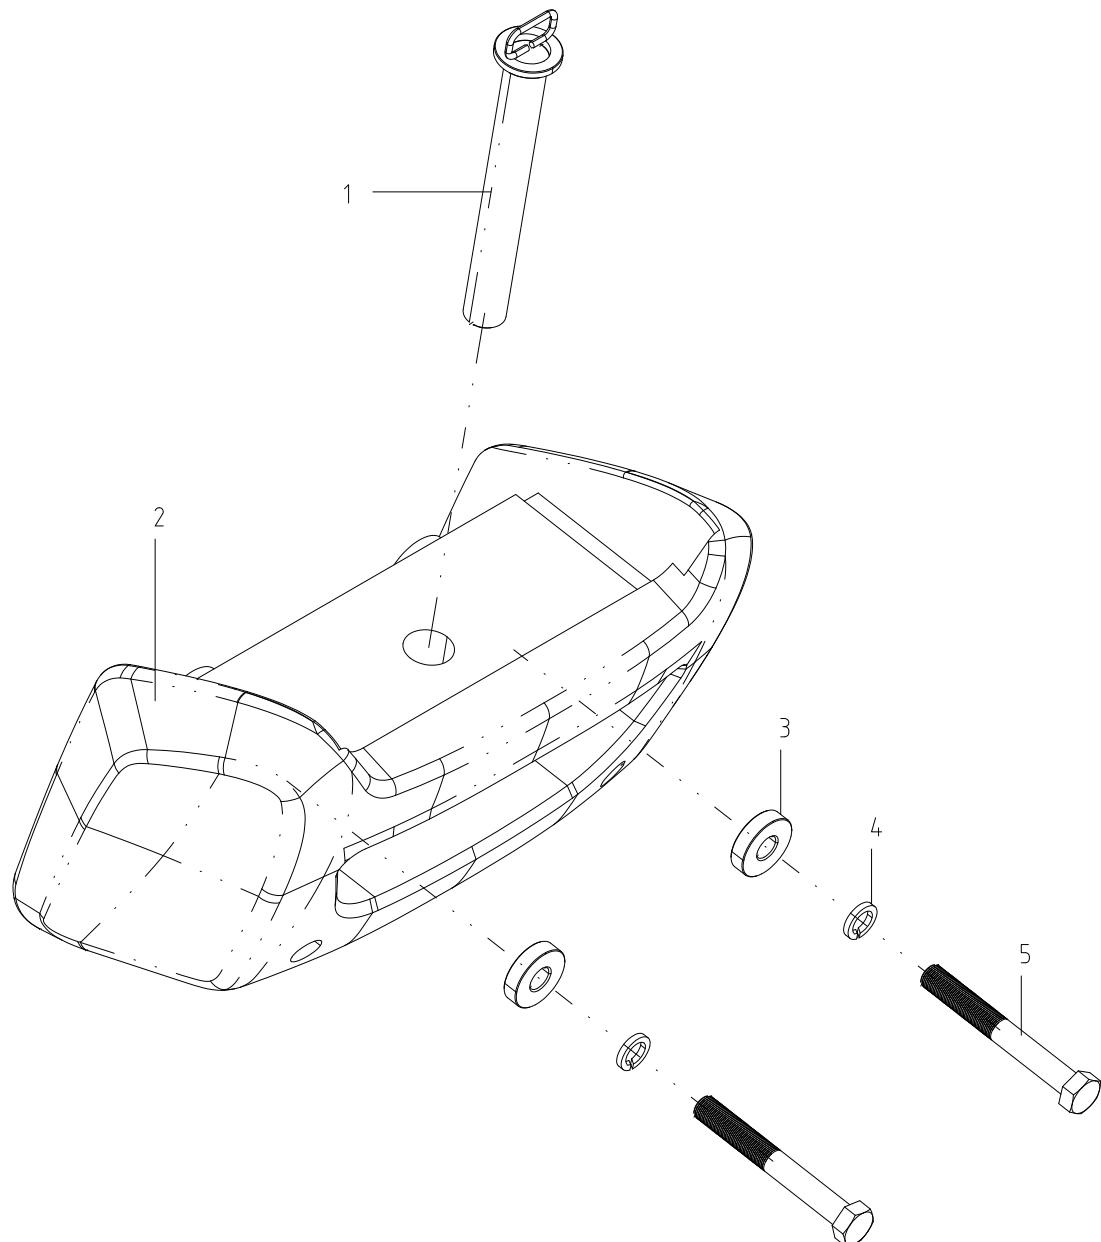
Counterweight Assembly (T25-60XHYG)
